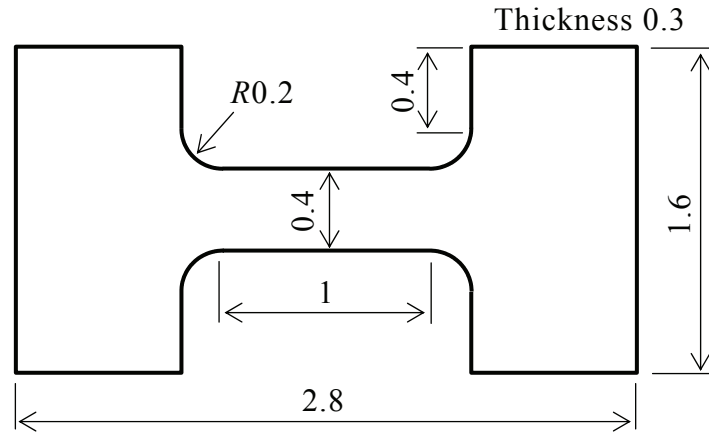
Shape and dimension of small tensile specimen (unit : mm).
